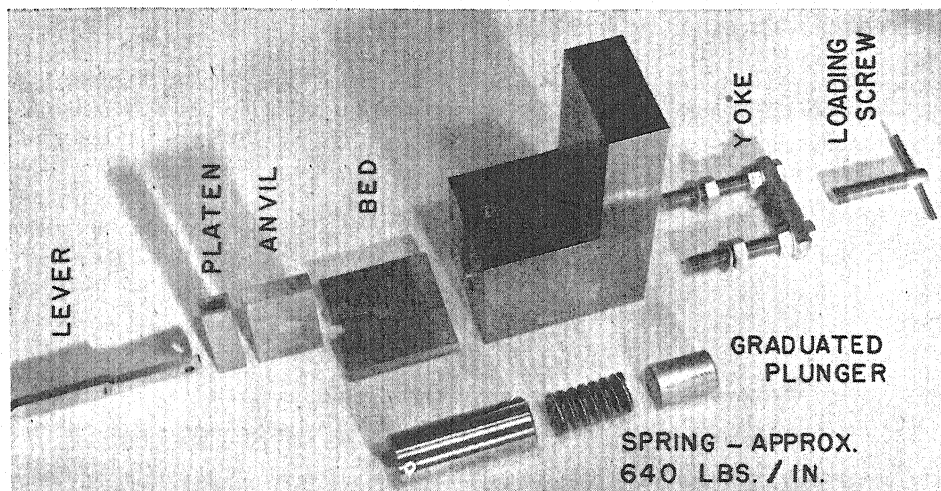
Compression Coupon Test Fixture Disassembled.
